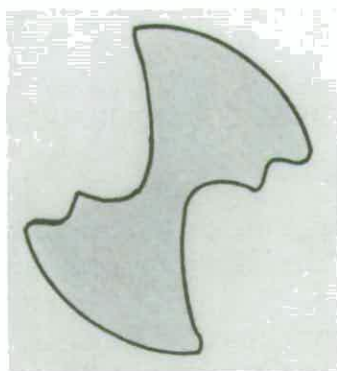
Transverse section through the flutes of Crisp design chip breaker drill
